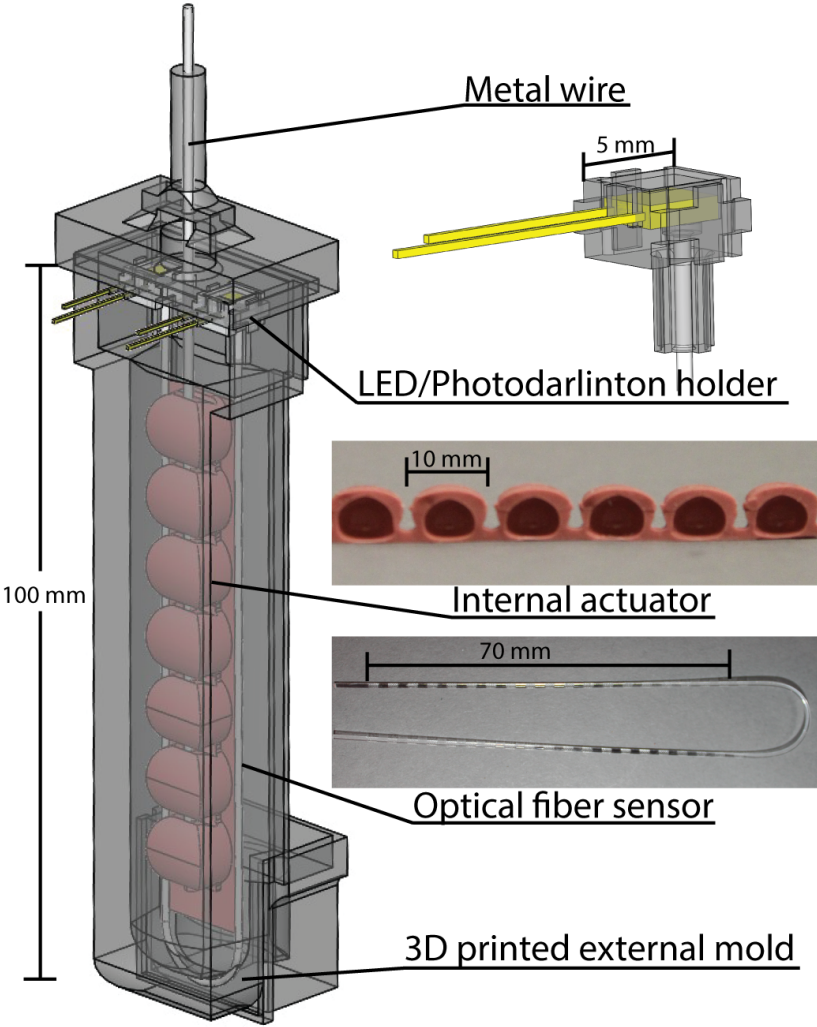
Assembly of parts cast into a single orthotic: optical fiber and LED/photo-Darlington was housed in the holders, and the holders were fixed on the mold through four pins.
